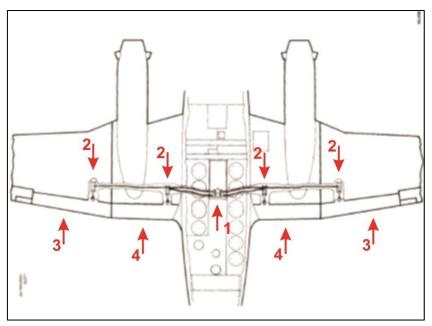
Flap system. Electric engine (1), actuators (2), outer surfaces (3) and inner surfaces (4).
